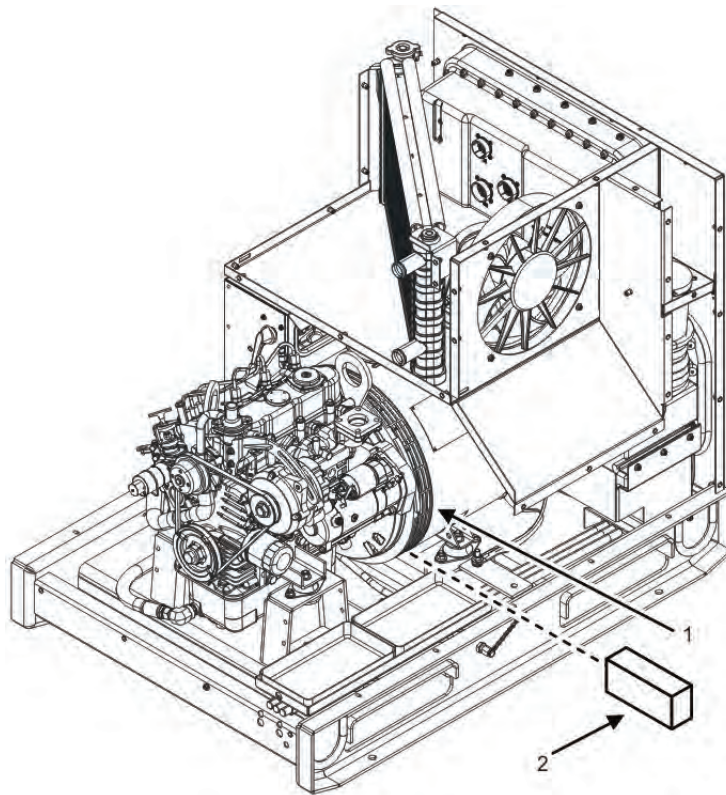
Engine Oil Drain Hose Assembly — Removal.
